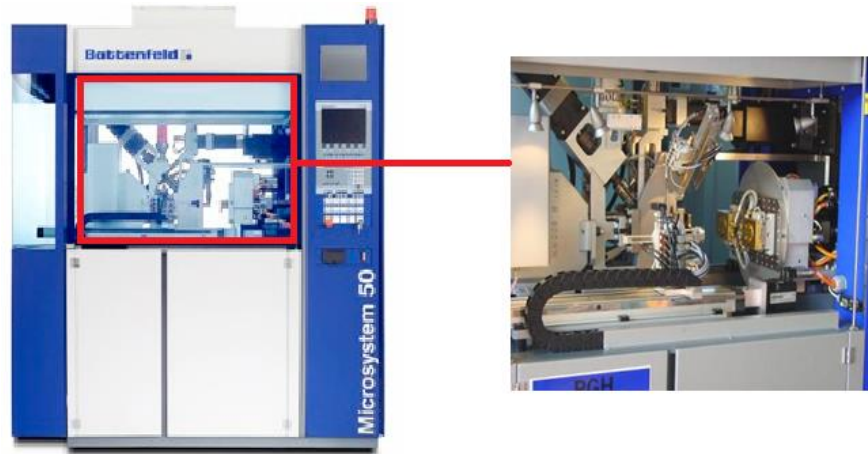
Battenfeld Microsystem 50 micro-injection moulding machine.
